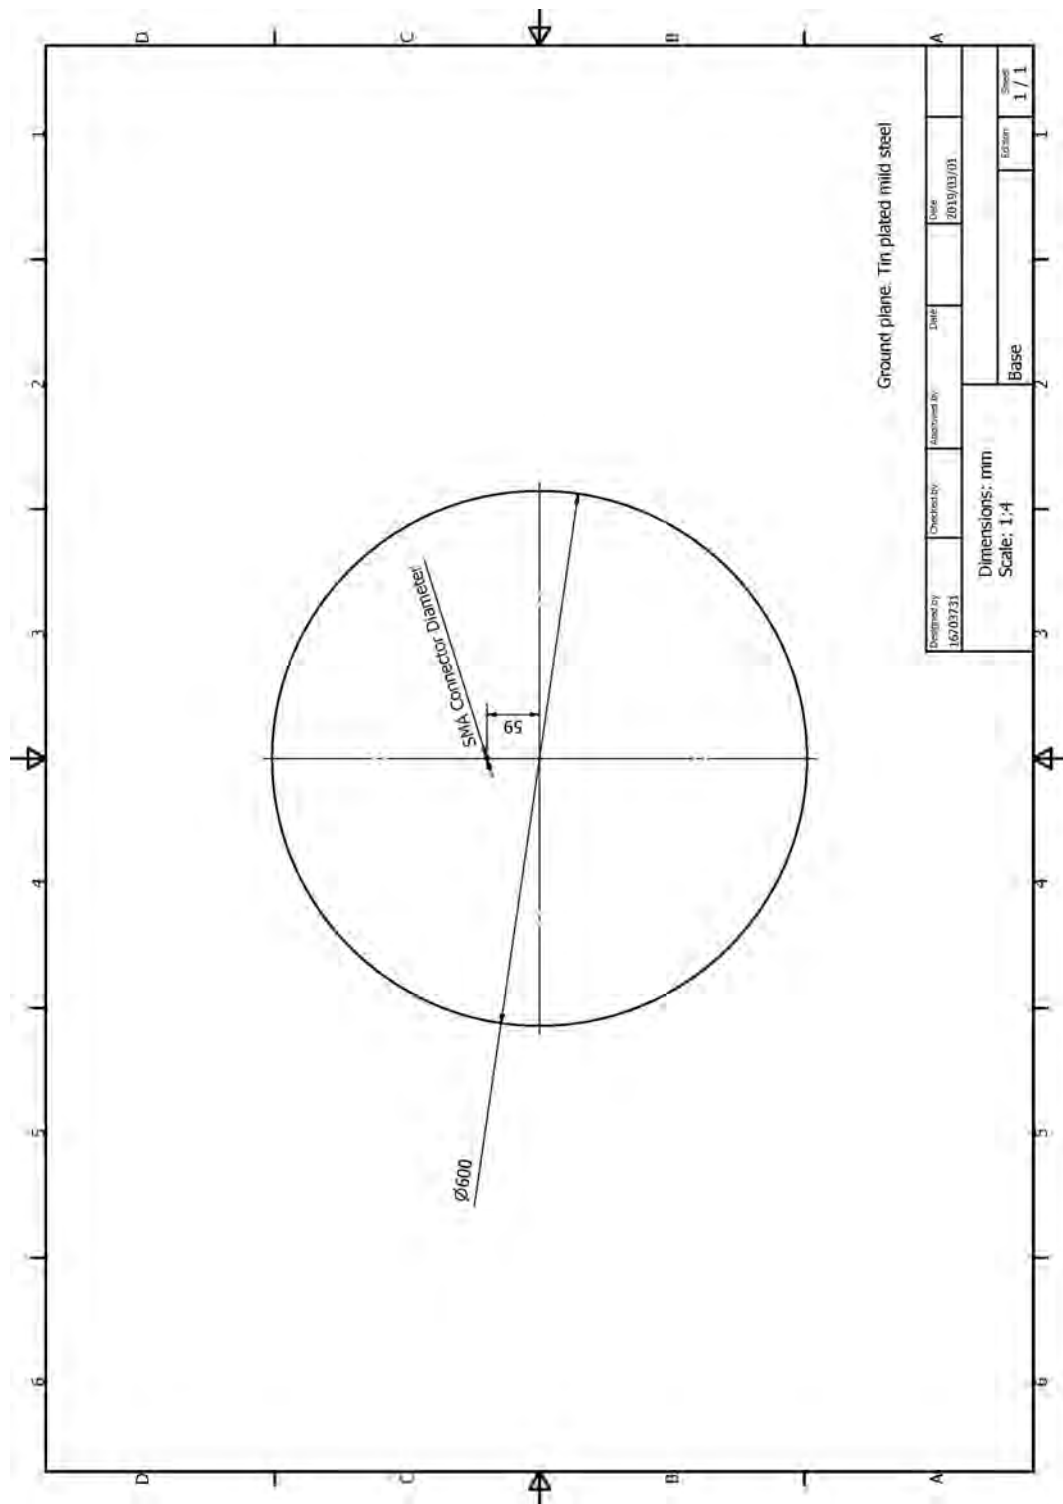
1:100 scale single element model tin plated mild steel base plate engineering drawing. This engineering drawing shows the base plate used for the 1:100 scale single element model.
